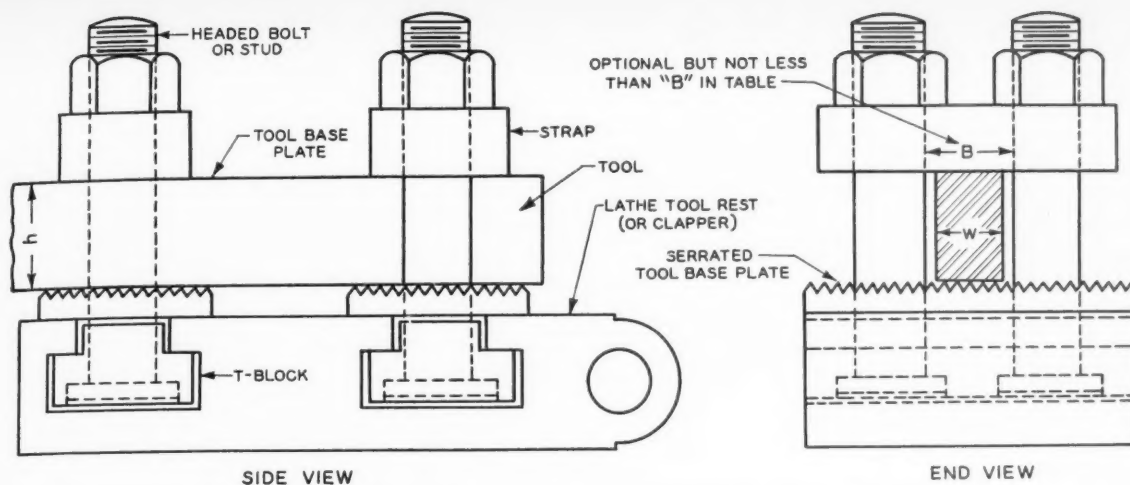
Strap and Stud Clamp Type of Tool Holder with Serrated Base.
